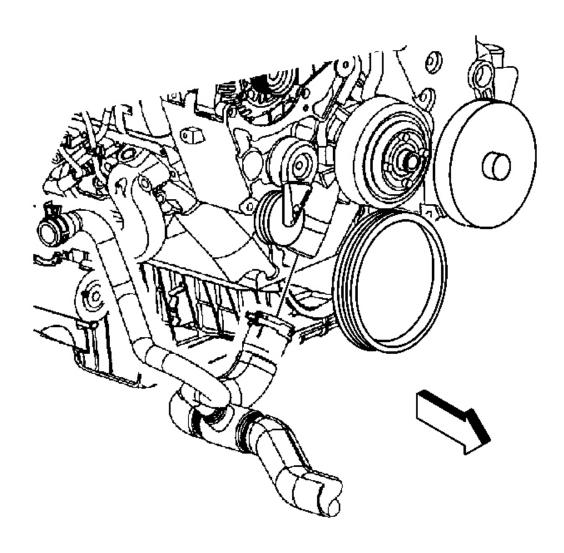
View Of Radiator Outlet Hose Courtesy of GENERAL MOTORS CORP.
